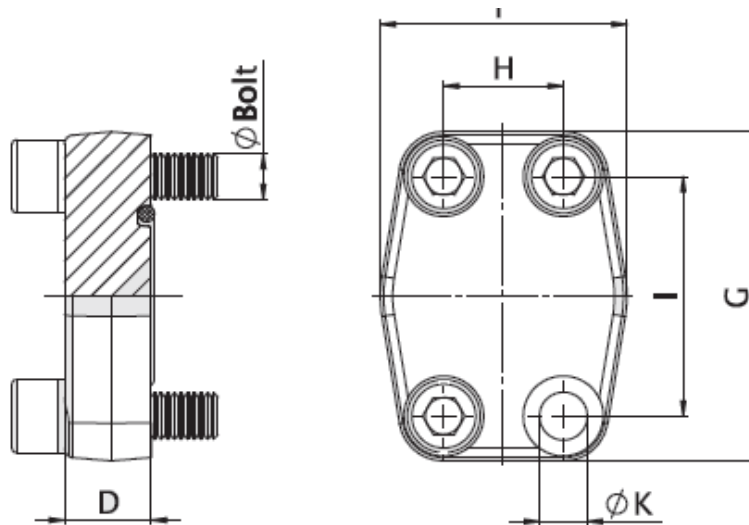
Drawing of SAE single part butt weld flange
